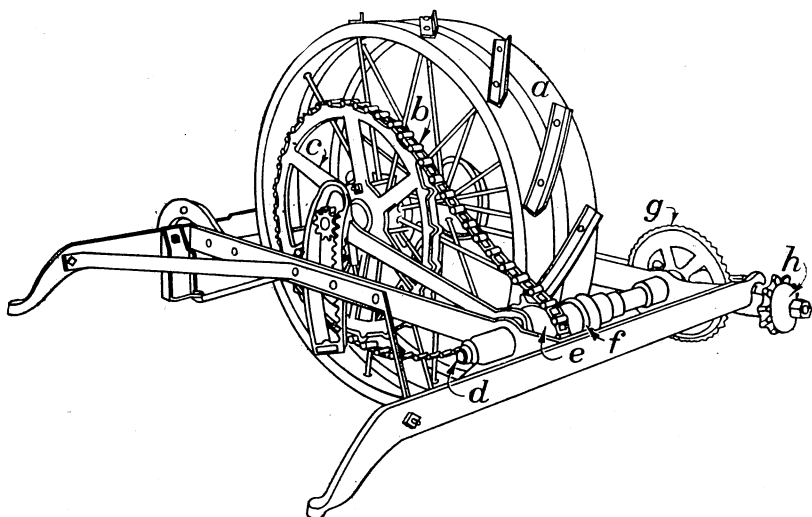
The main wheel and the countershaft assembly of a binder: *a*, Main wheel; *b*, drive chain; *c*, drive sprocket; *d*, adjustable thrust bearing; *e*, shaft sprocket; *f*, clutch; *g*, bevel gear, *h*, crankshaft sprocket.
